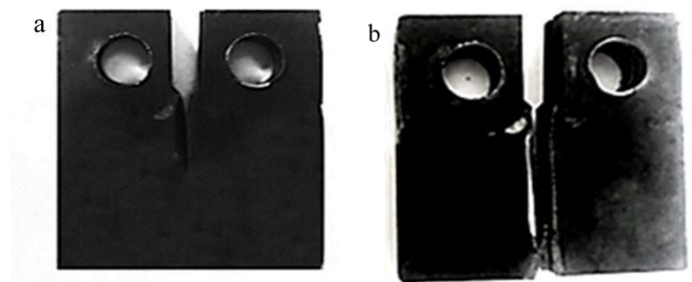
Samples a) initial crack; b) after Fatigue Crack Growth Test
